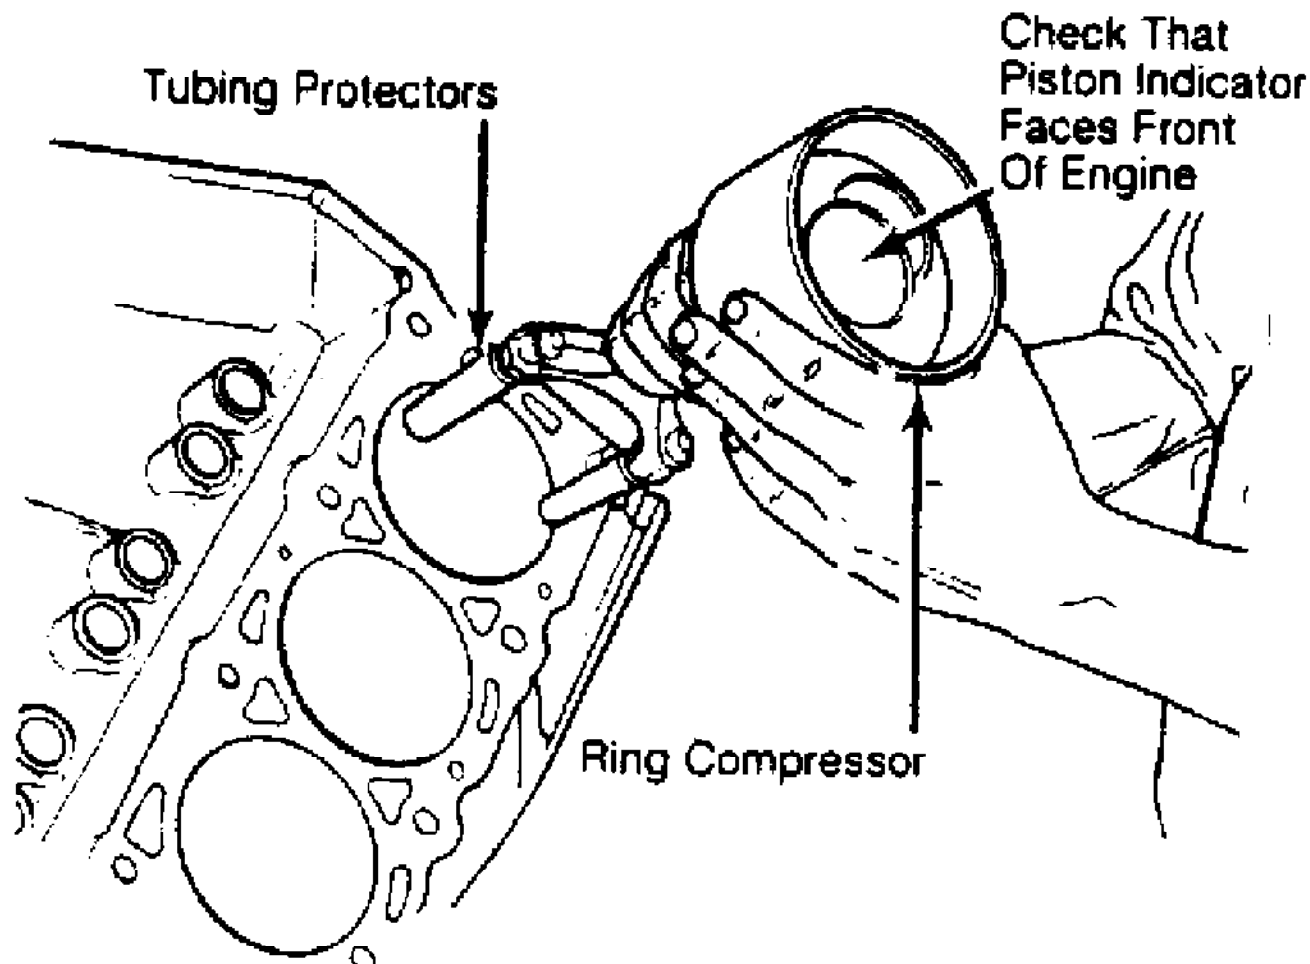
Installing Piston & Connecting Rod Assembly - Typical
